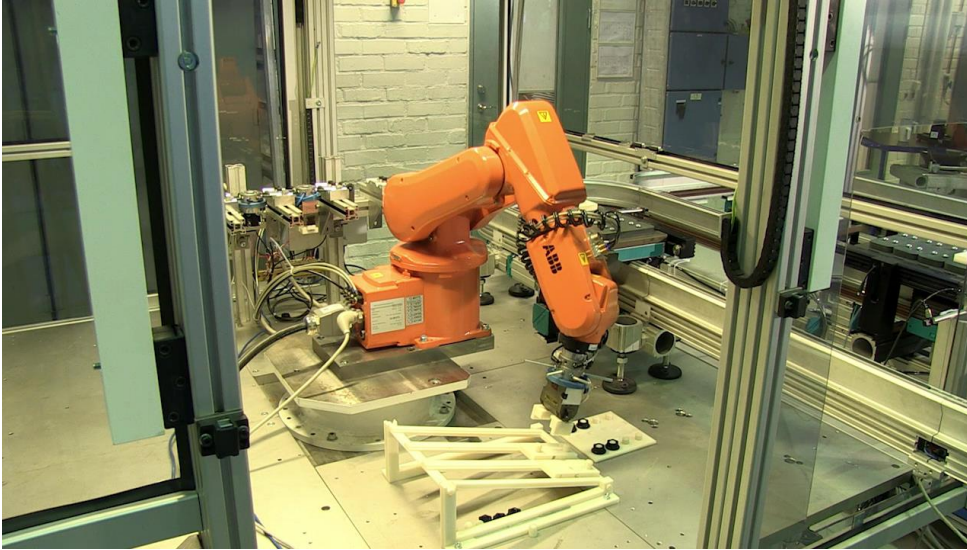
The Washing Machine Components Assembly System (KTH)
